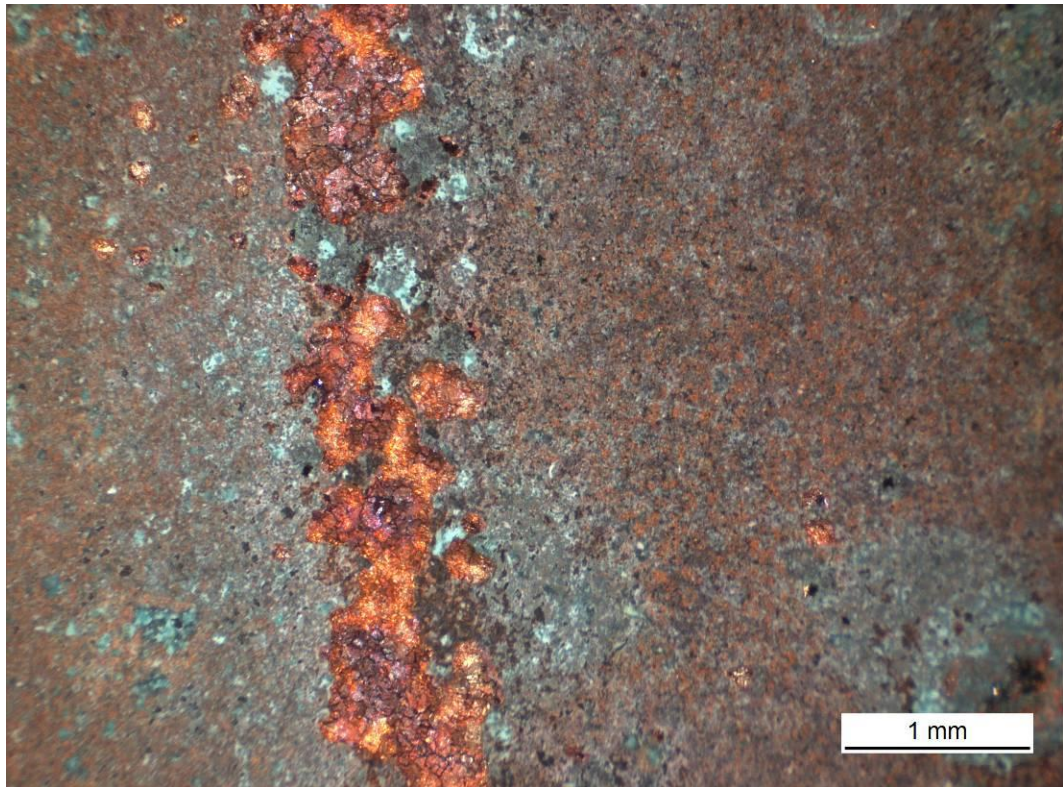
Pitting corrosion on the outer surface of the specimen FSW L75-2 after the corrosion experiment in saline water at 90°C
